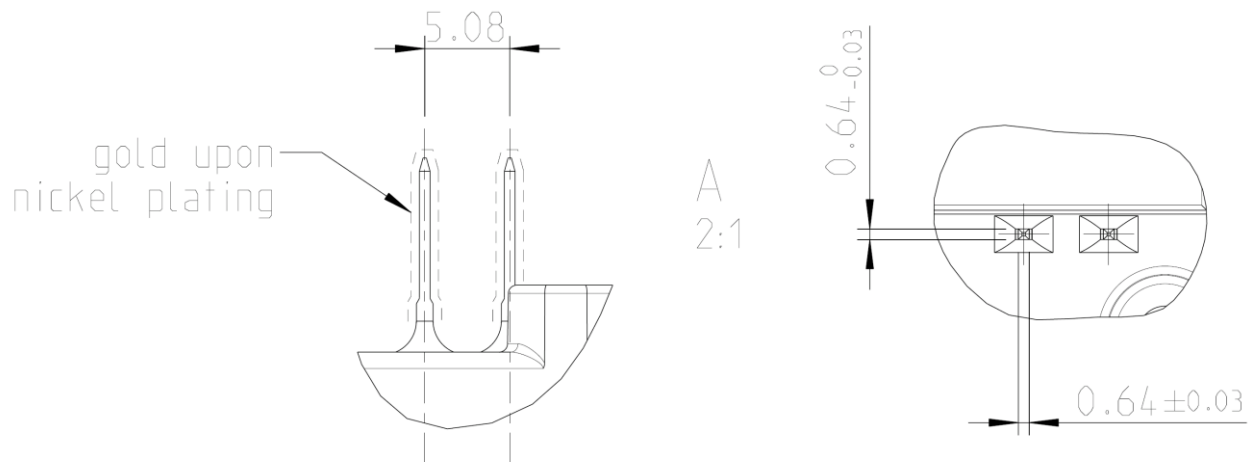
Technical drawing of the HybridPACK™ 2 auxiliary terminals (pin connectors).
